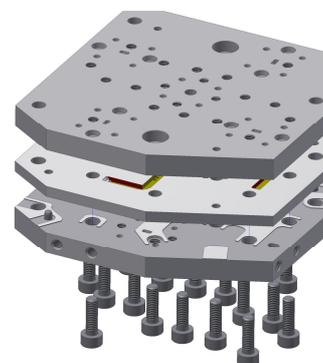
Mechanical assembly of the 3-piece DL-2SB block.
